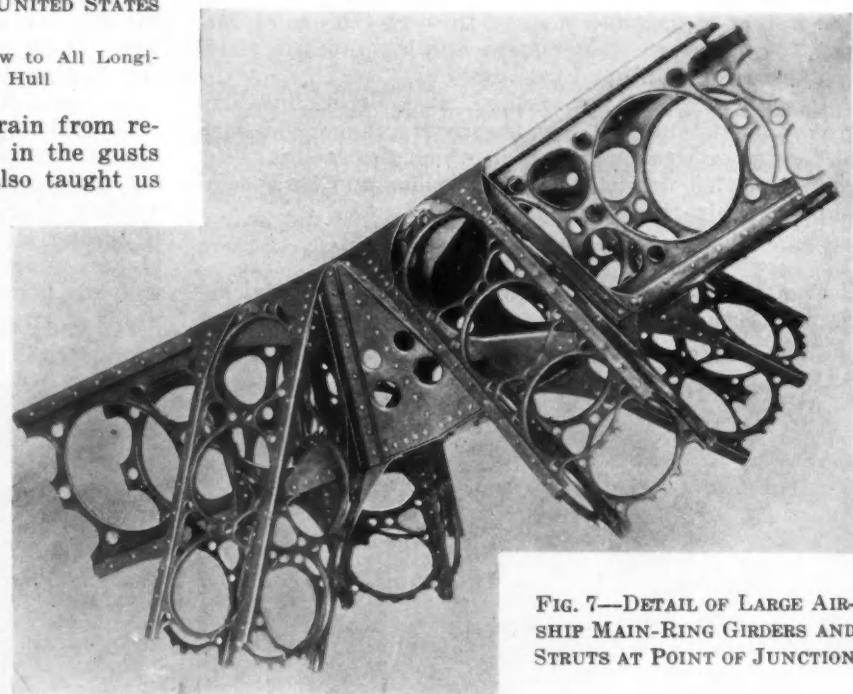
DETAIL OF LARGE AIRSHIP MAIN-RING GIRDERS AND STRUTS AT POINT OF JUNCTION
